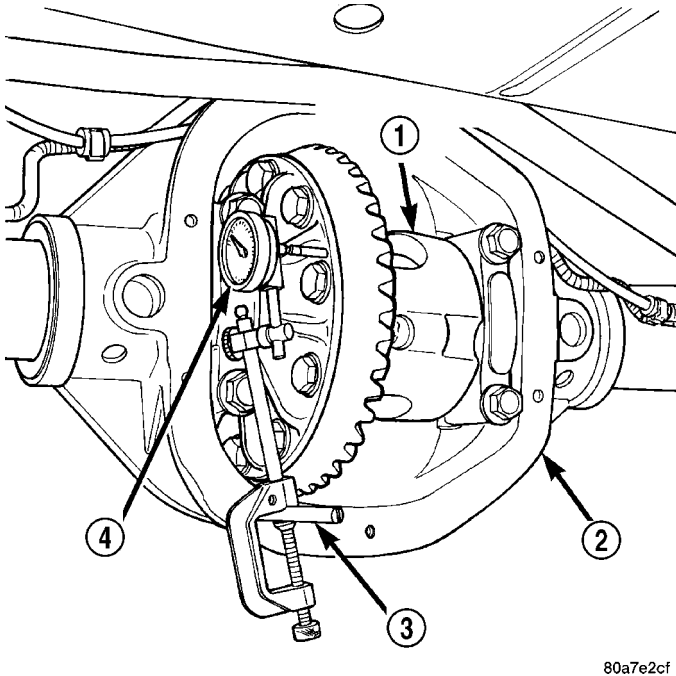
DIFFERENTIAL SIDE PLAY MEASUREMENT
